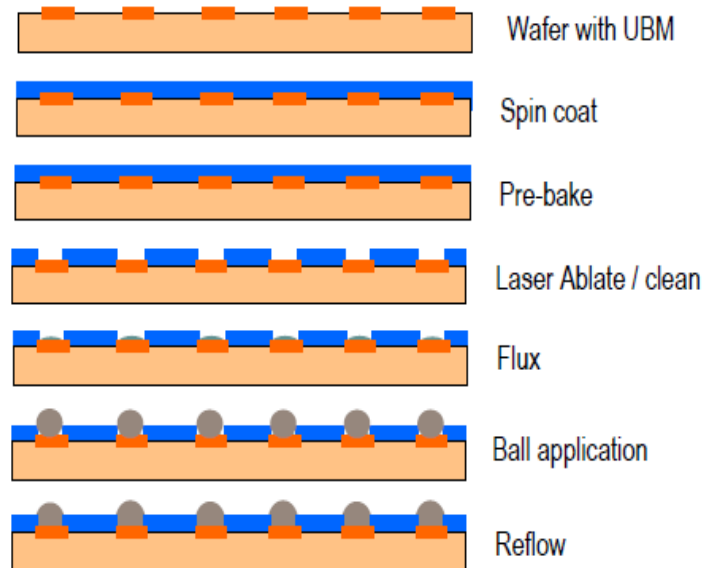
Process flow of a laser ablated coating-type wafer level solder brace
